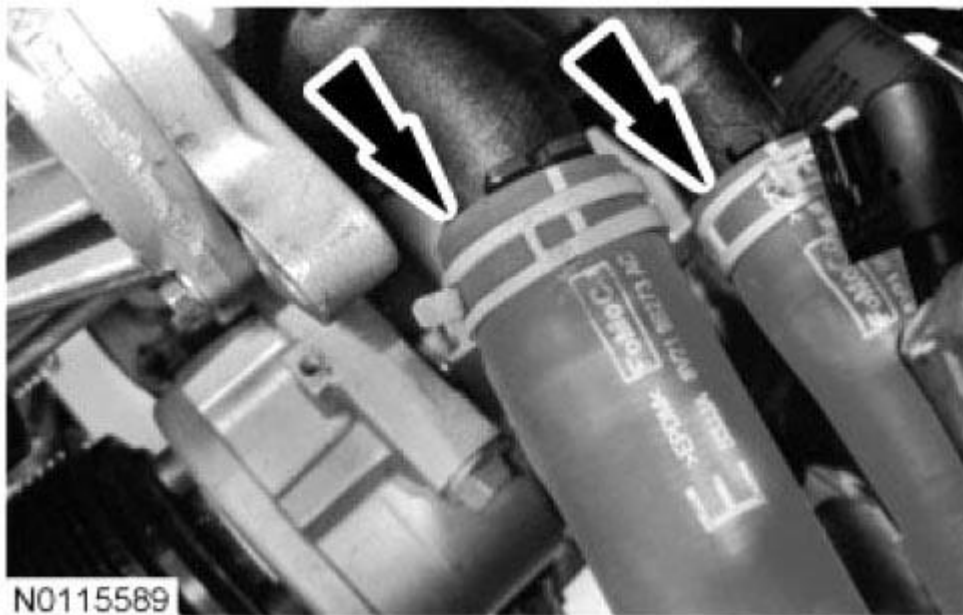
Locating Lower Radiator Hose And Coolant Hose To Thermostat Housing
